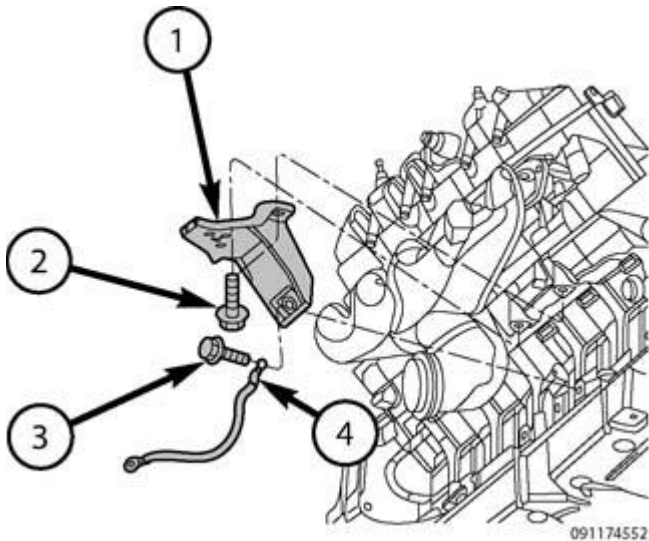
Ground Strap, Engine Mount Bracket & Bolts
